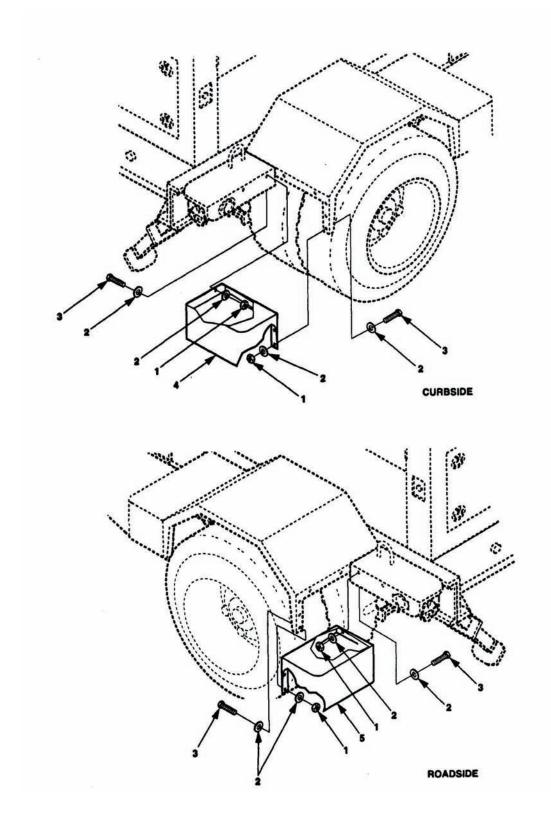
2.5 Ton Trailer, Rear Steps.
